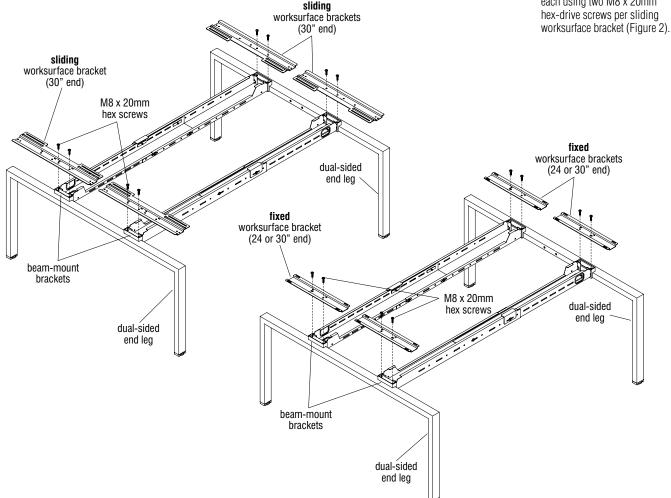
Dual-Sided Stand-Alone Benching Worksurface Brackets
